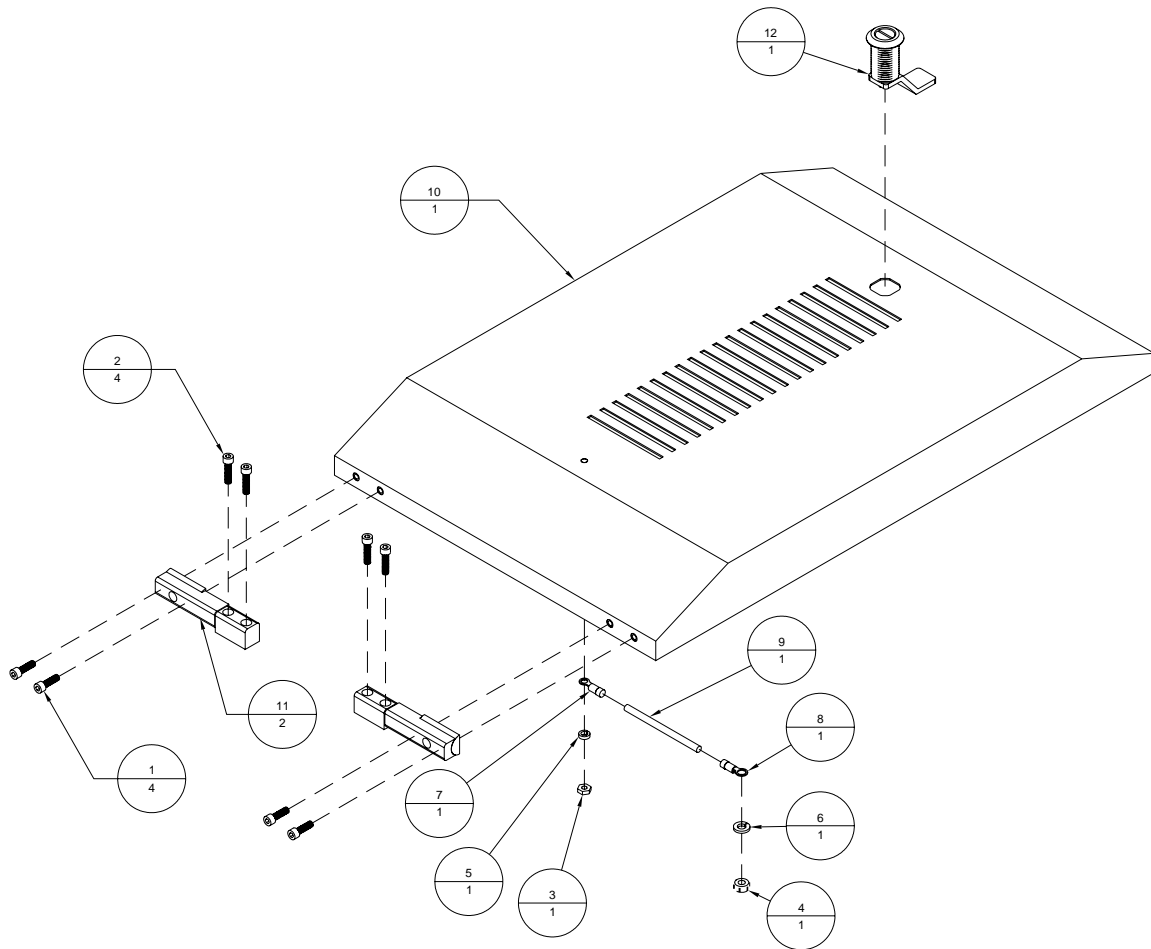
Side Door Assembly, Bottom (9103362A)
